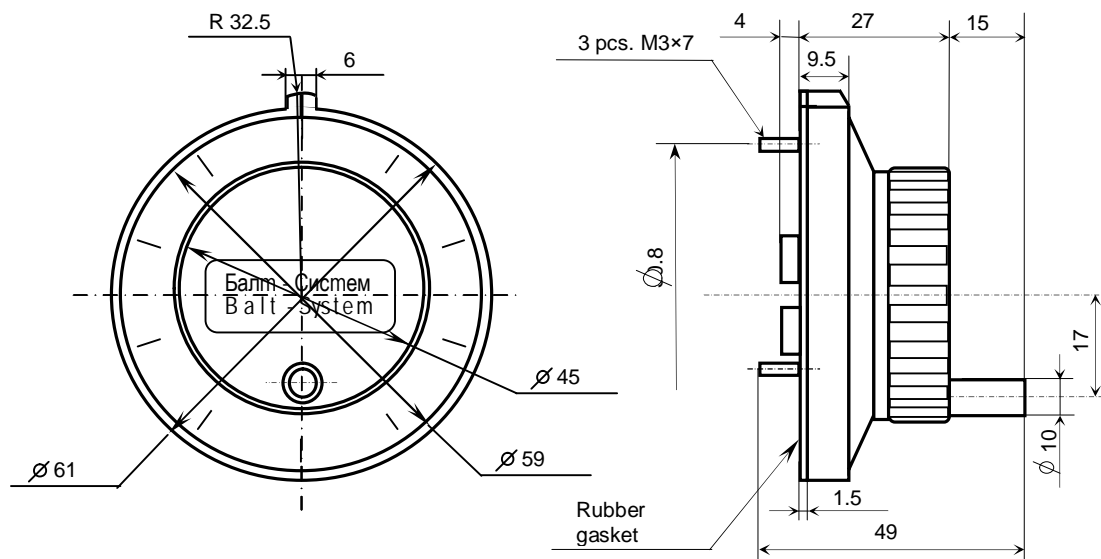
The Overall Dimensions of the ZBG-5-003-100 Hand Wheel
